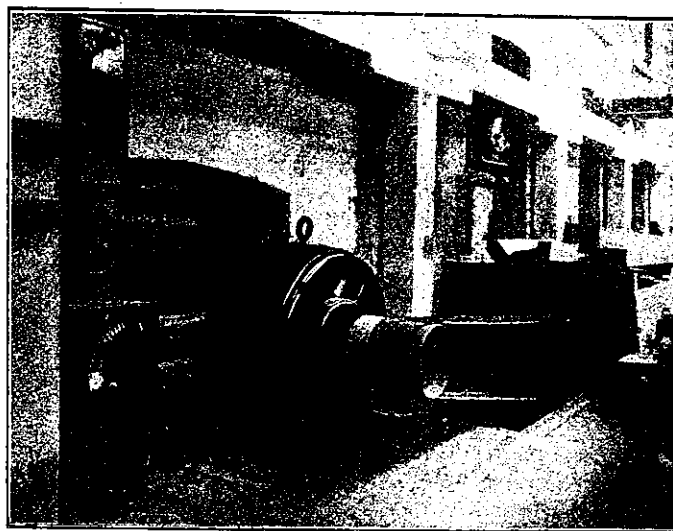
A 60 H.P. MOTOR DRIVING LOG FRAMES AND OTHER MACHINERY
